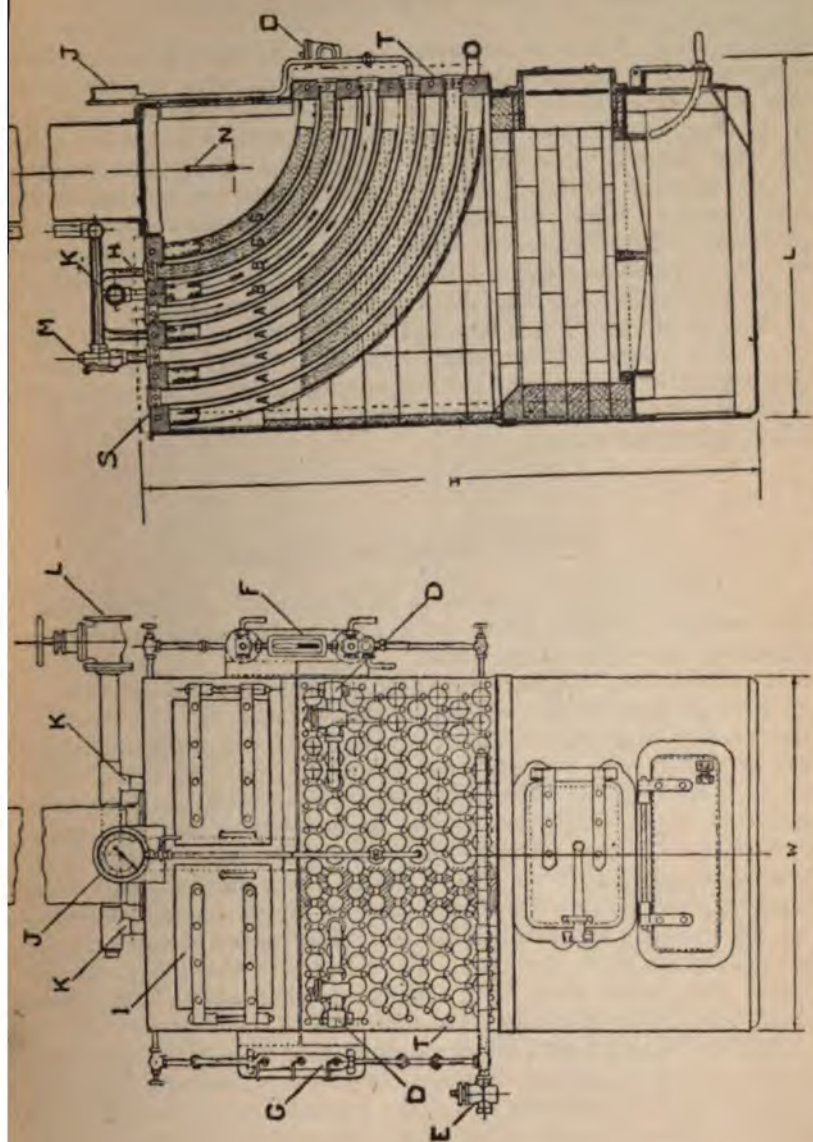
Transverse and Longitudinal Sections of the "Hay" Water-tube Boiler. A are Steam and Water-tubes; B, Drying and Superheating Tubes; C, Feed-water Heating-tubes; H, Pipes from Feed-heater to Boiler; S, Top-header; P, Bottom-header; K, Steam Collecting Pipe; N, Steam Jet.
